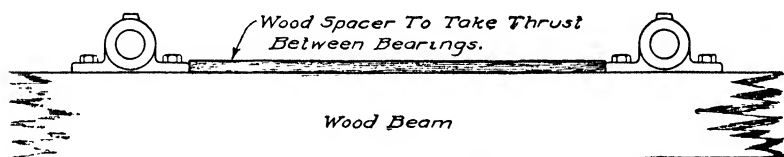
Method of Fastening Bearing Boxes on Wood Beam
